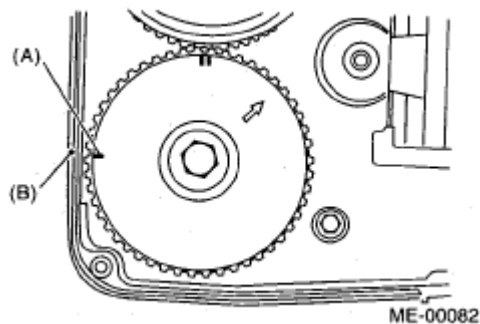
Identifying Single Line Mark On Exhaust Cam Sprocket (RH) And Timing Belt Cover
